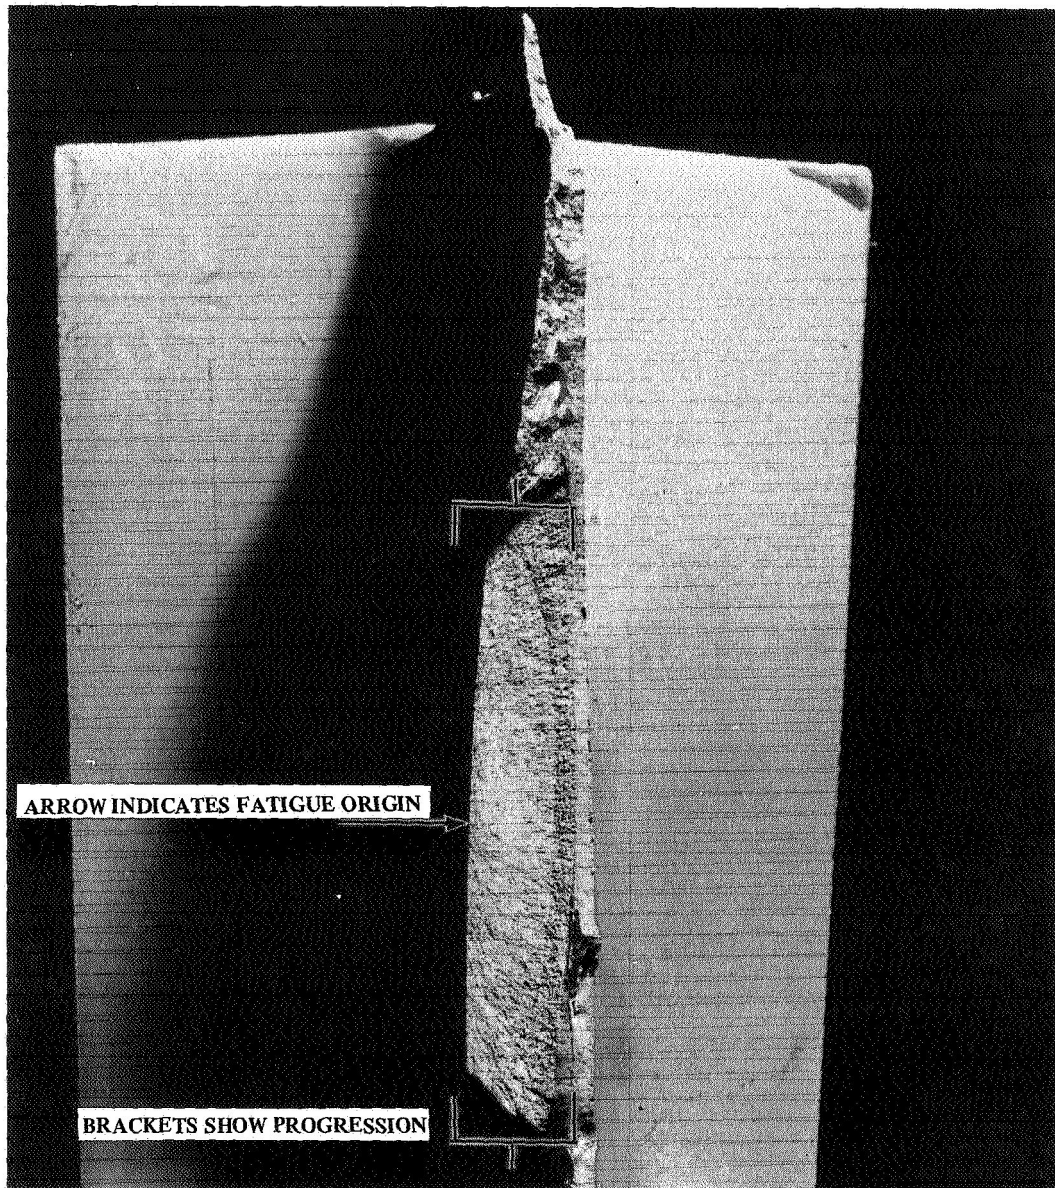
Fatigue Progression on Failed Rotor Blade No. 1
